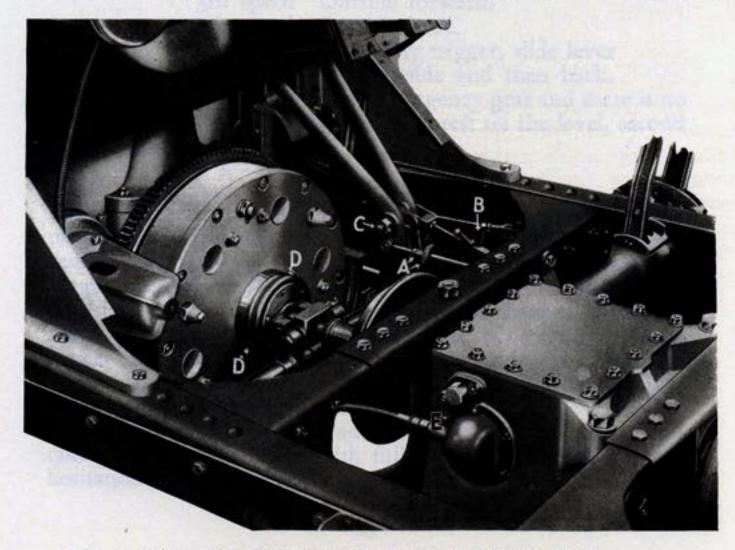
GEAR BOX CLUTCH, SPEEDOMETER DRIVE, ETC.
